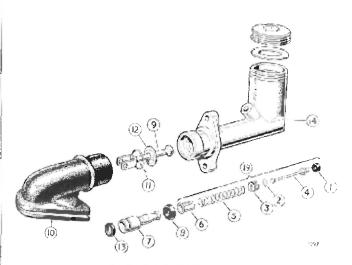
Exploded clutch master cylinder Annotations are given under Fig. 4.
